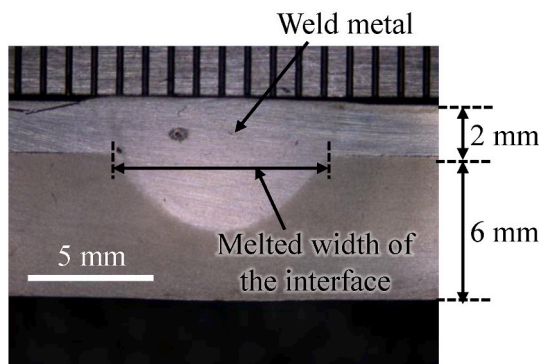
Cross-sectional macro after the welding time of 48 s under the thick plate condition.
